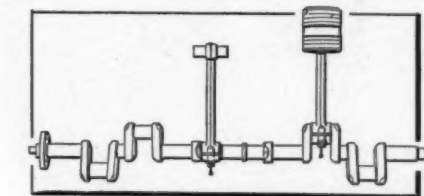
Six-cylinder crankshaft, showing connecting rod with a pin fixed in the rod end
